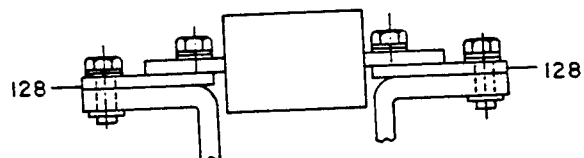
Mounting detail for 300, 350, and 400 ampere fuse
